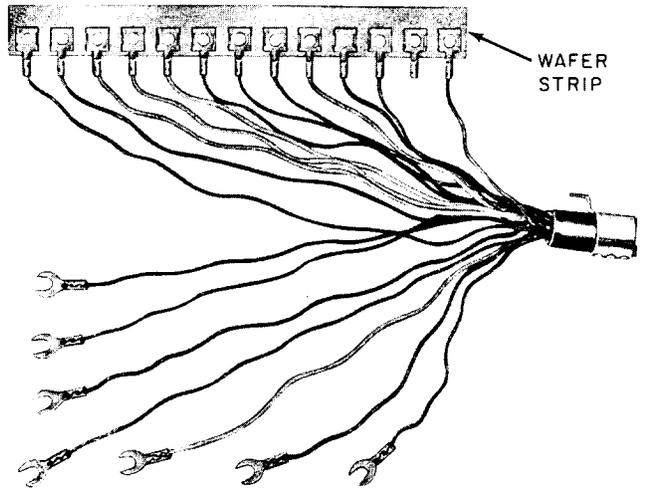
Nonslotted Wafer Strip End of Mounting Cord, Early Type
